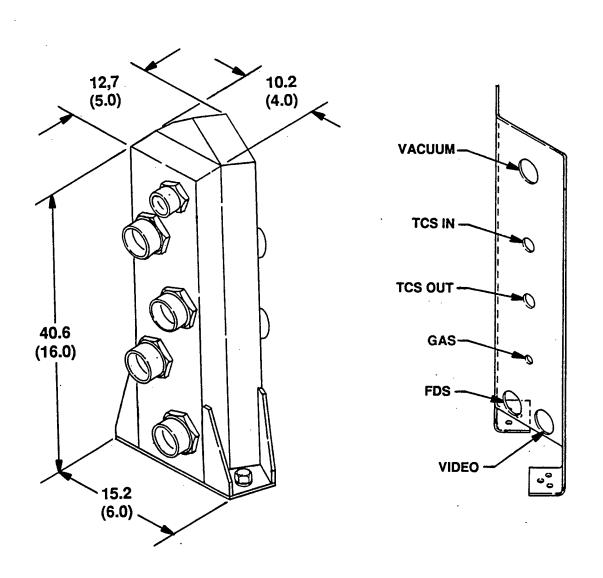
EXPERIMENT RACK-1 PANEL LAYOUTS
